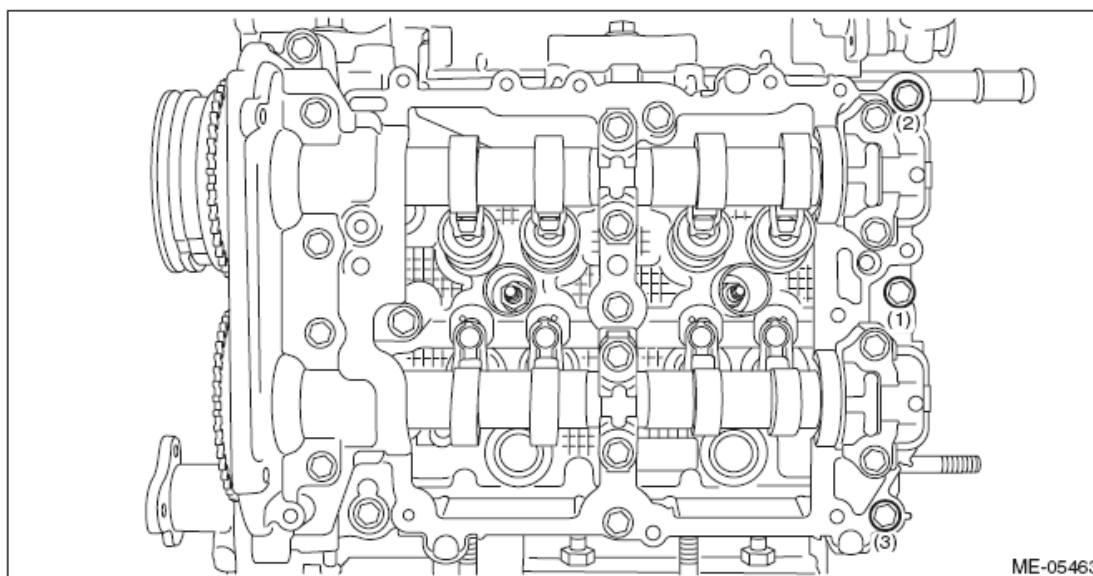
Identifying Cam Carrier Bolts Tightening Sequence
